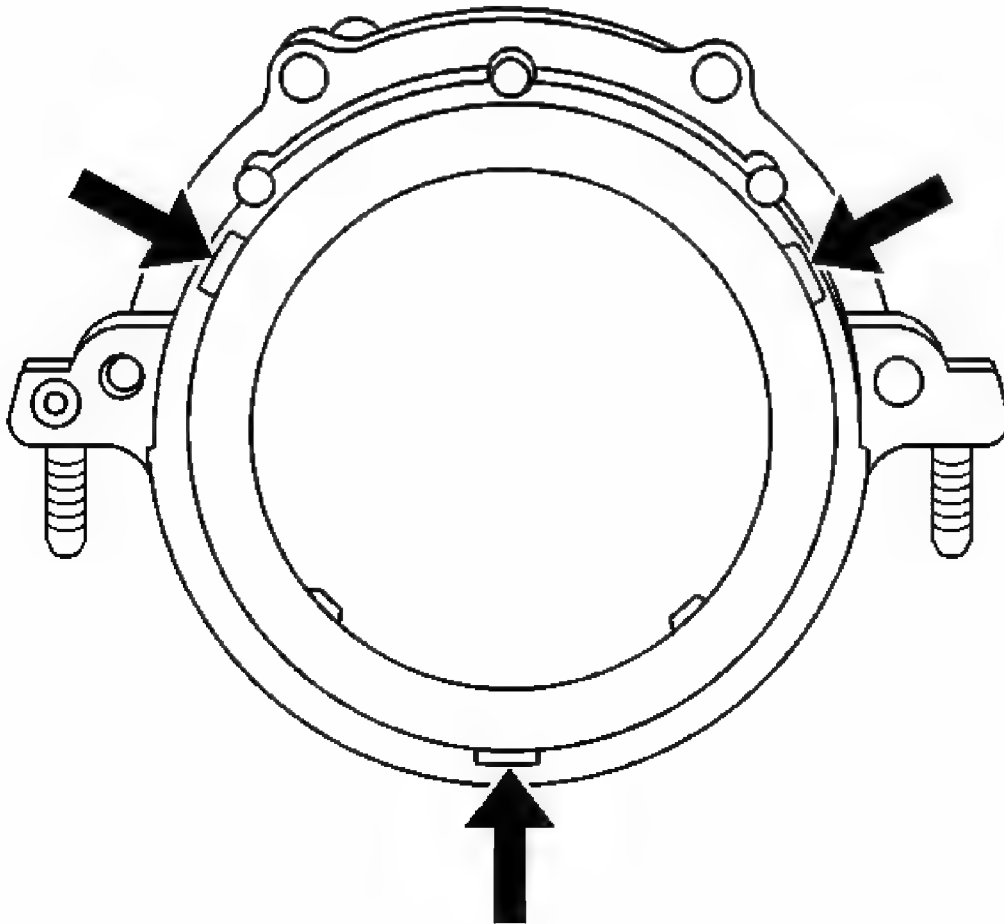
Locating Crankshaft Rear Oil Seal Access Notches
